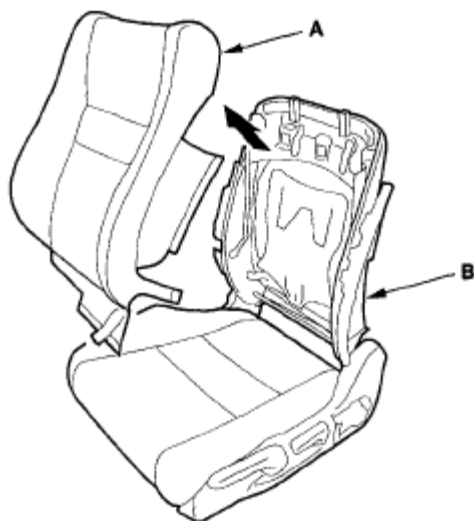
Removing Seat-Back Cover/Pad From Seat
